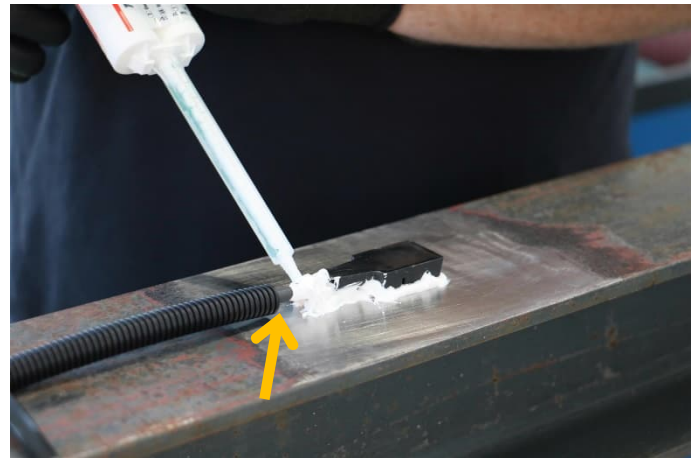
Applying the adhesive and sealing compound underneath the cable
